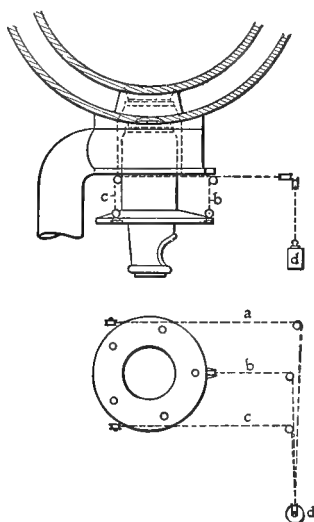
Method of Suspending and Balancing Exhaust Valve and Cage for Quick Removal.
